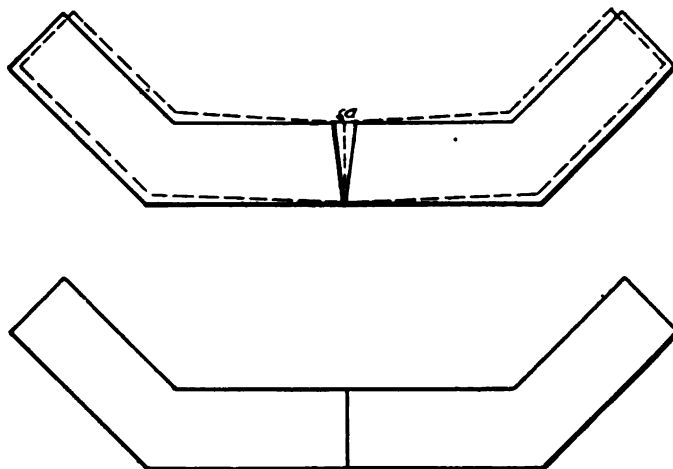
Sectional Blanking Punch, Showing Exaggerated Opening for Making Adjustments and Completed Sections
